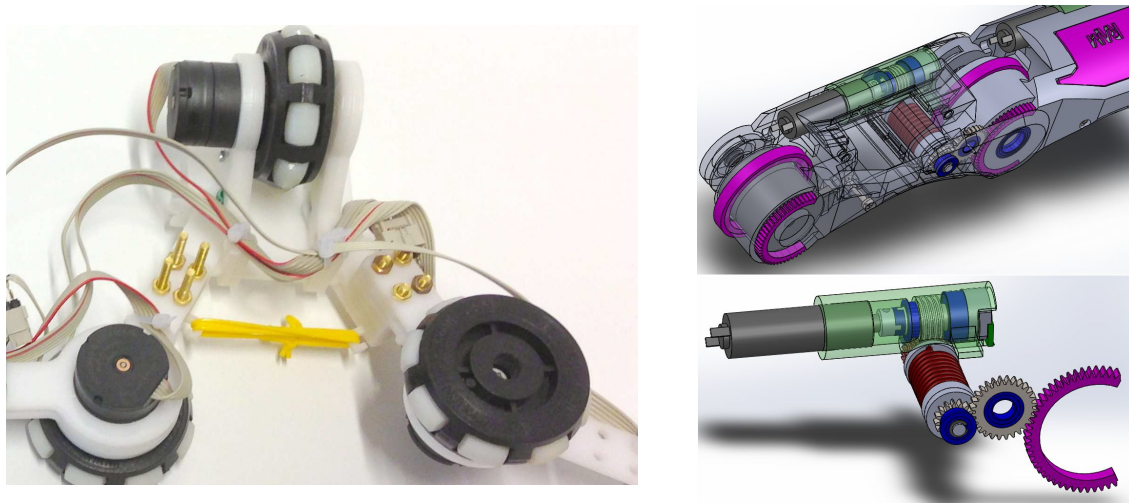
The clamping mechanisms of the original omniwheel prototype (left) [15], using elastic bands, and of the other PIRATE design [1] (right), using a motor, a worm gear, a rotational spring and a set of spur gears.
